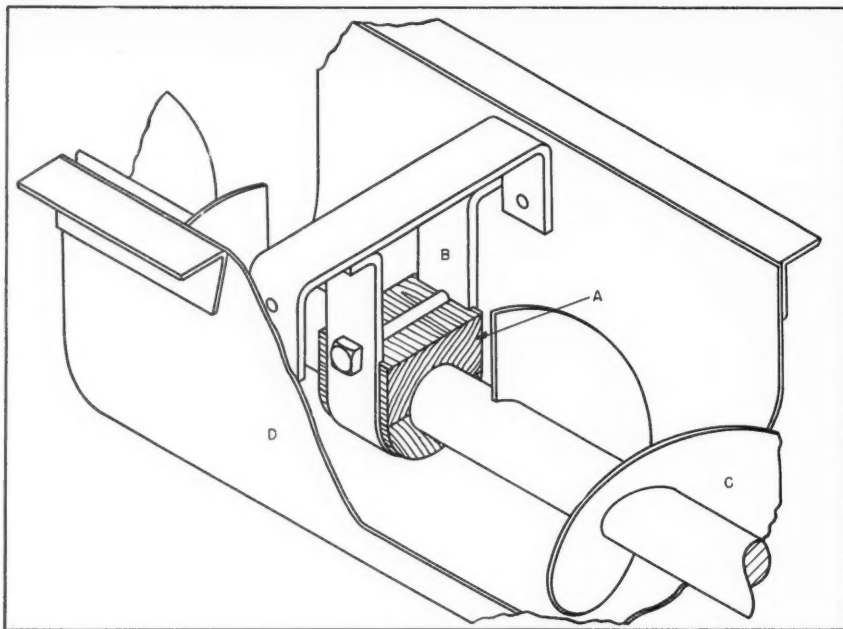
Materials that cannot be allowed to become contaminated by oil or grease can be safely handled in screw conveyor (C) by using an oilless wood bearing (A)
